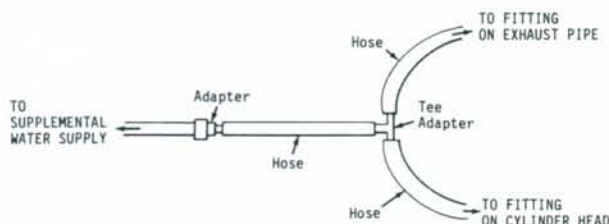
Remove bypass hose (H—Fig. JS3-30), then connect components as shown to fitting (F—Fig. JS3-30) on cylinder head and exhaust pipe to connect a supplemental water supply.
